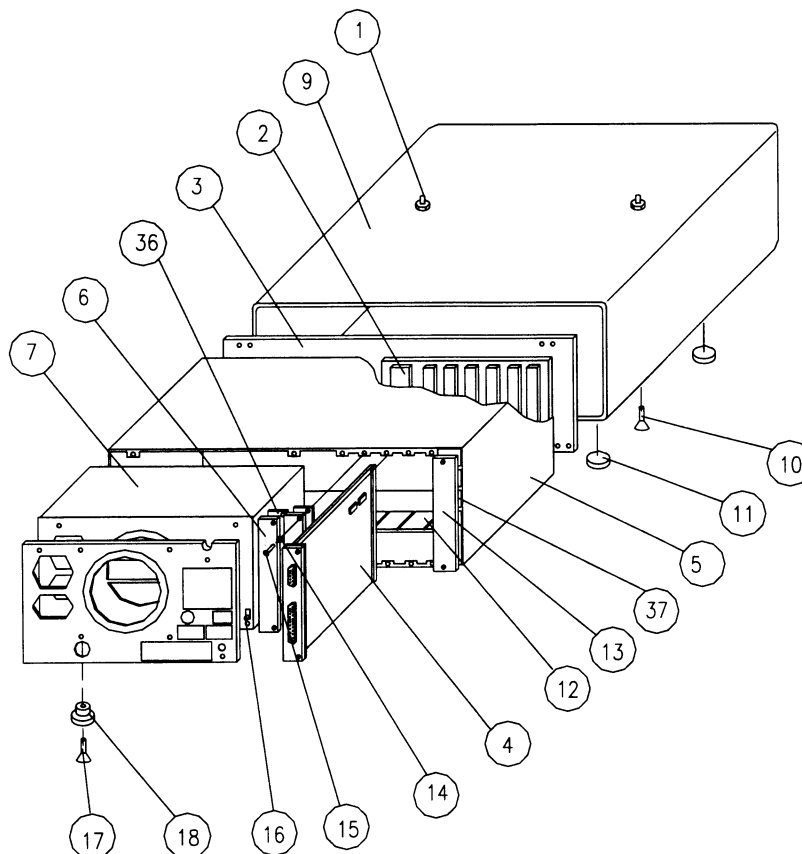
Exploded view of the Central Unit F-CU8 (rev.03-09)
